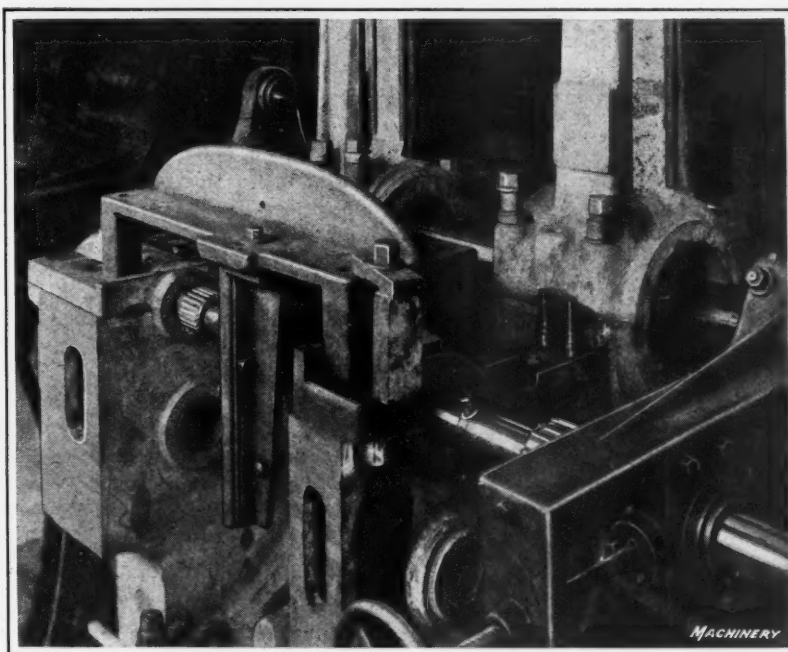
Close-up View of the Work showing Boring-bars with Reamers and One Tool
